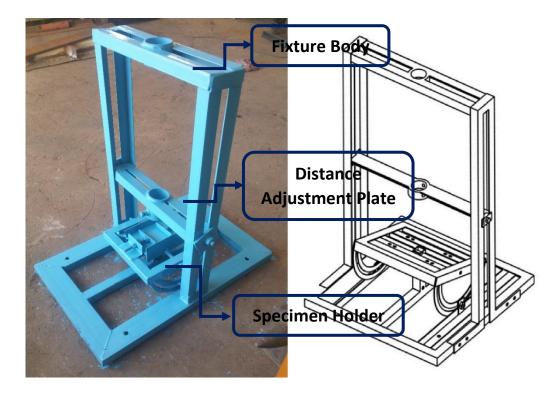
The sand-blasting fixture used in the test and its drafting.
